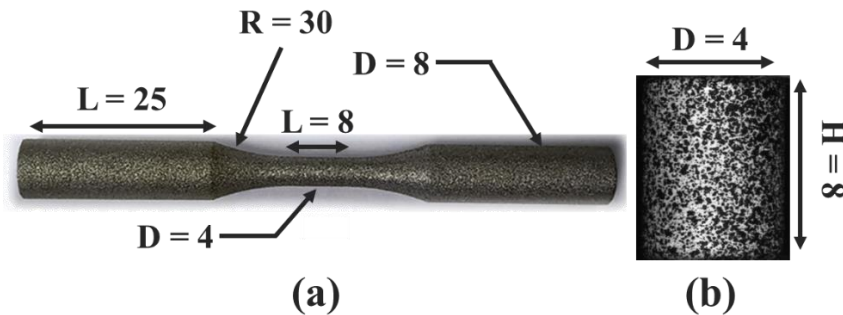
Specimen geometry for (a) static tension and fatigue tests, and (b) static compression tests (all dimensions in mm).
